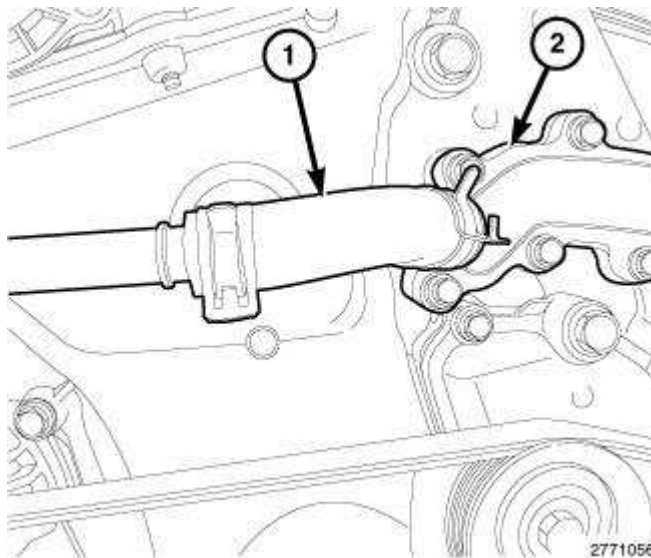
Heater Core Supply Hose & Coolant Outlet Housing
